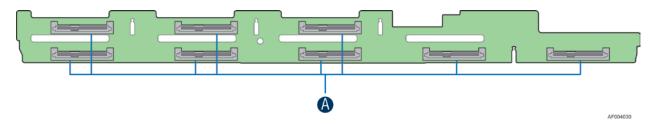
2.5" Drive Hot-Swap Backplane – Front Side
